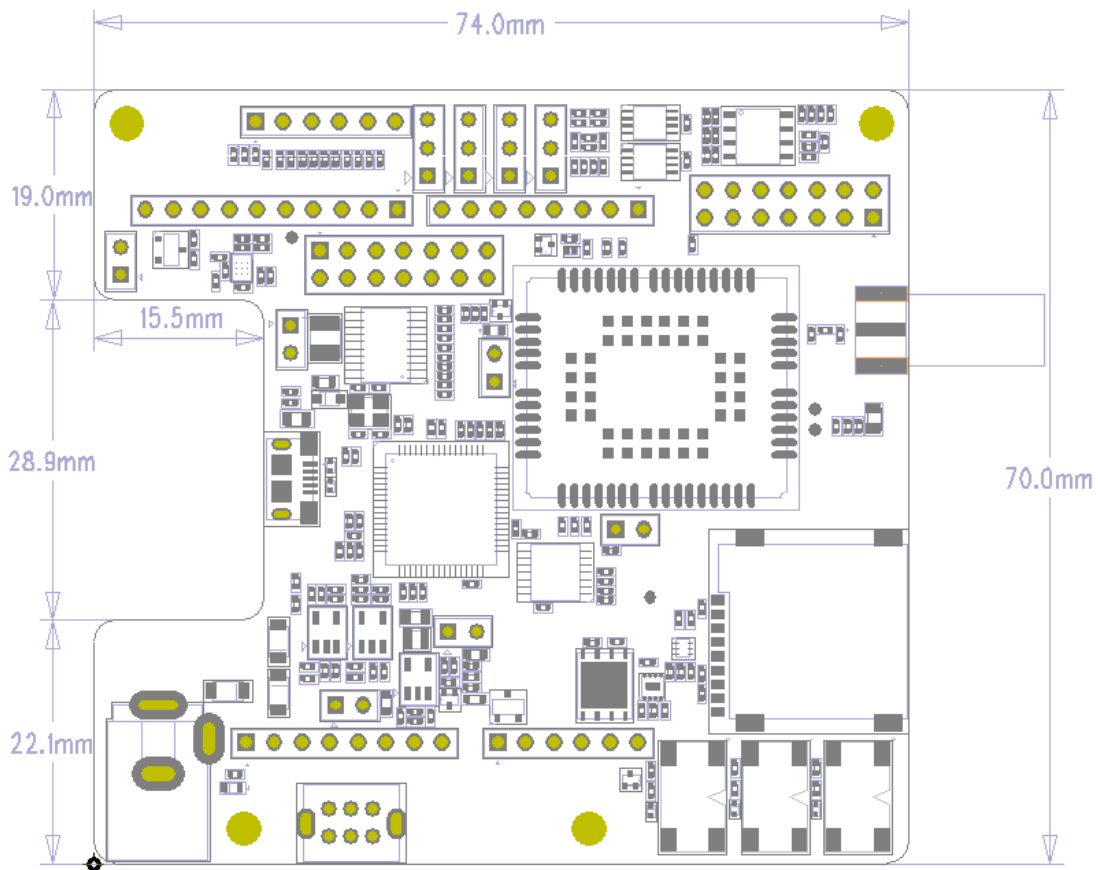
Dimensions of BC95-GR-TE-B (Top View)
